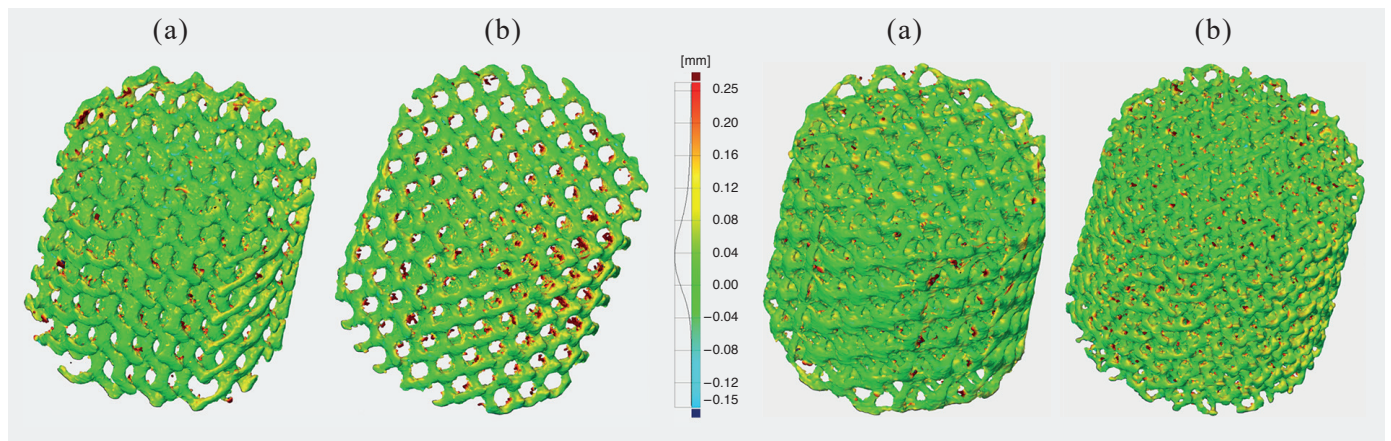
Dimensional accuracy of: a) Gyr_6080, b) Diam_6080
